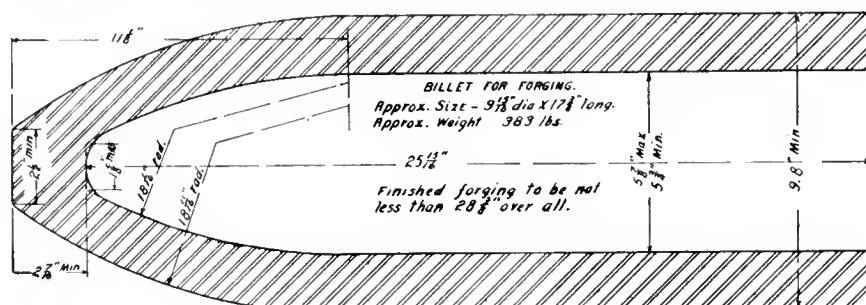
FORGING SIZES FOR 9.2 IN. HOWITZER SHELL.
